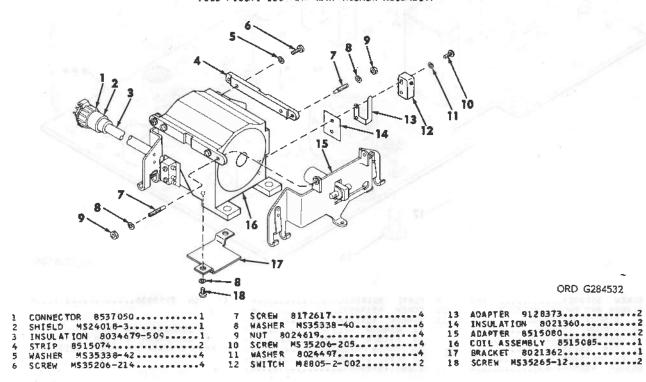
ELECTROMAGNETIC ACTUATOR /8515081/-EXPLODED VIEW /SEE FIGURE 124 FOR NEXT HIGHER ASSEMBLY/
